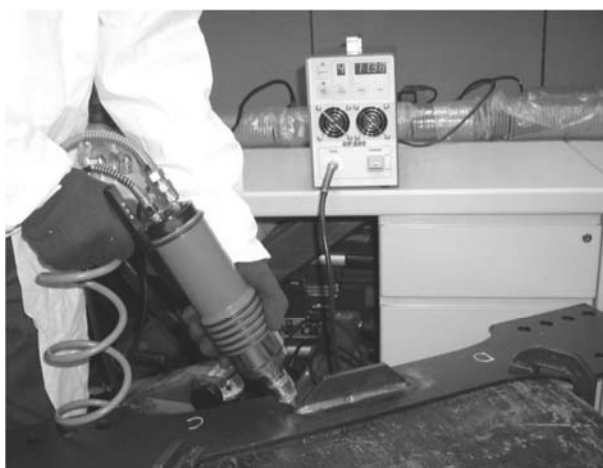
Ultrasonic impact treatment (UIT/UP) of welded sample for fatigue testing
